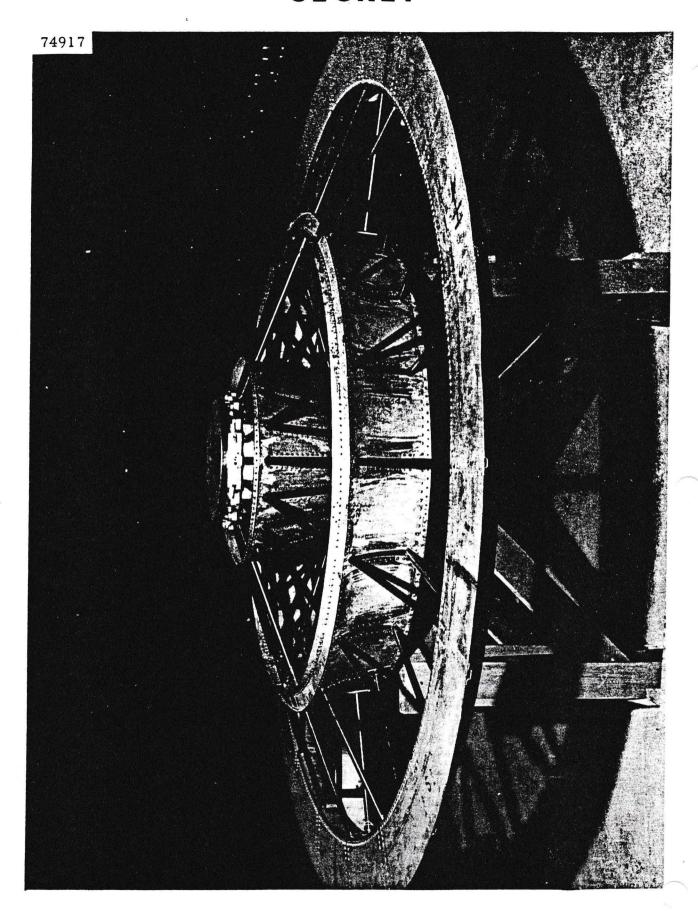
TURBINE AND COMPRESSOR - ROTATING STRUCTURE
